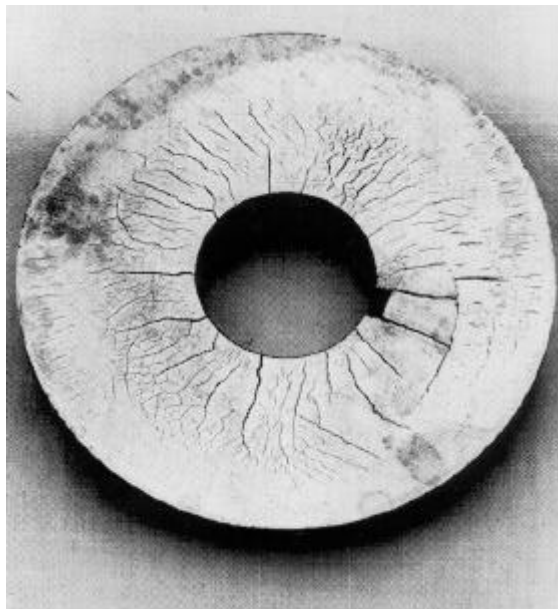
Magnetic Particle Indications of Grinding Cracks in a Stress-Sensitive, Hardened Surface.
